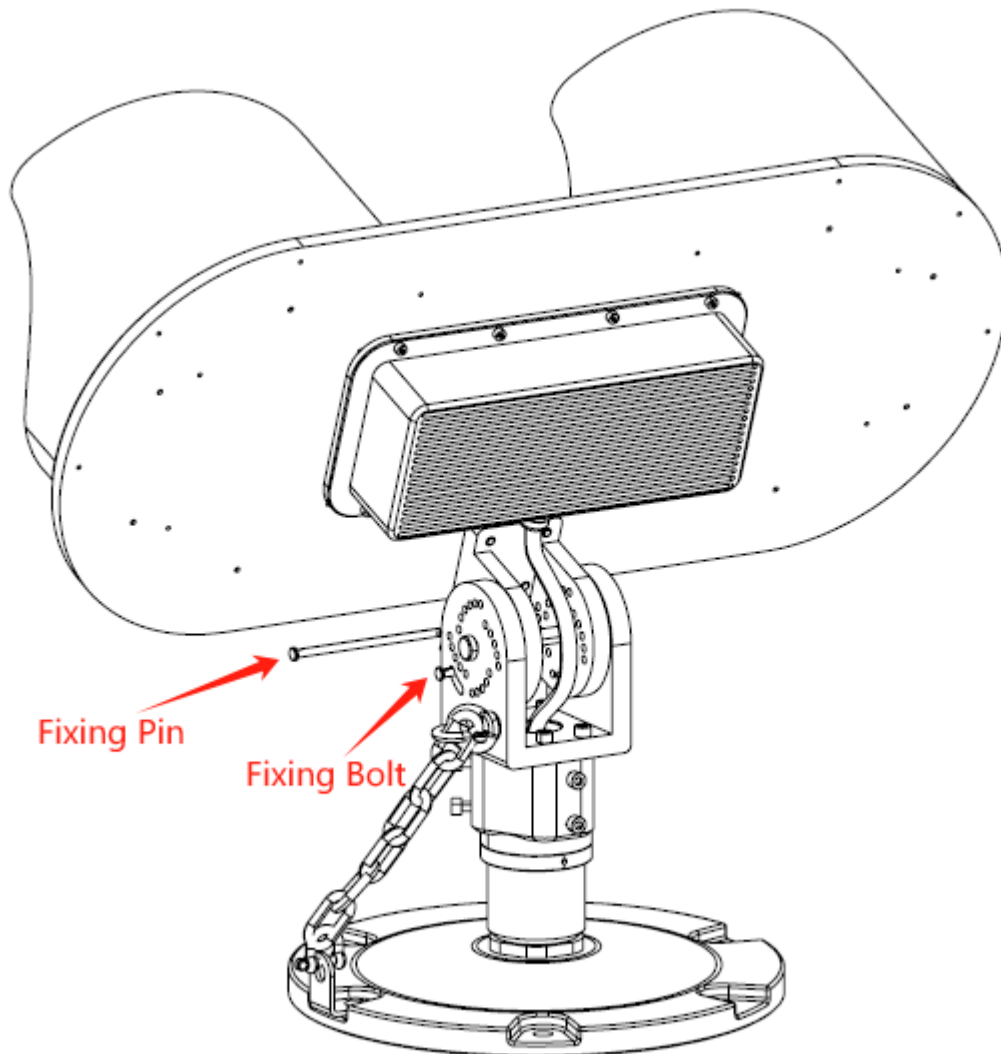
Installation of Elevated Runway Guard light scale ring 2
